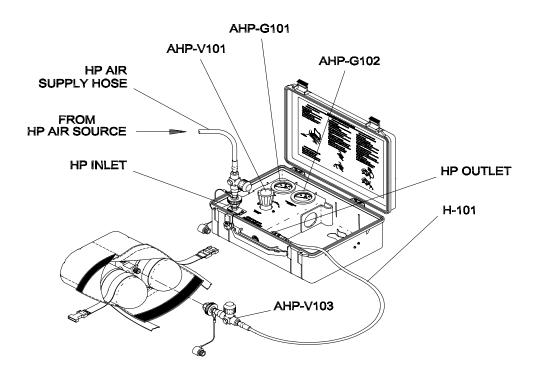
Equipment Setup (Shown with SCBA Cylinders)
